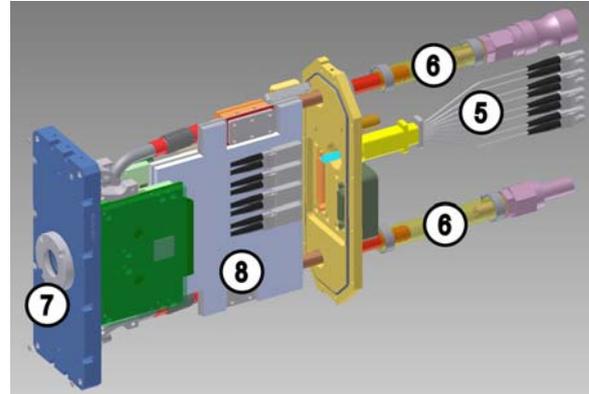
AOWFS camera showing 5) Fiber feed-through, 6) Water cooling pipes, 7) CCD window, 8) Rear side of Main board.
